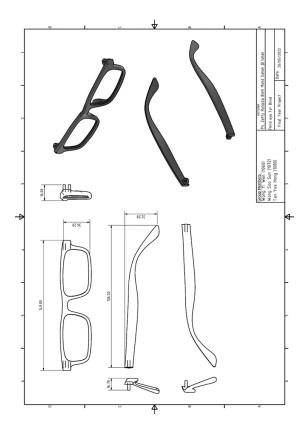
Detail drawing of 3D printed spectacle frame
